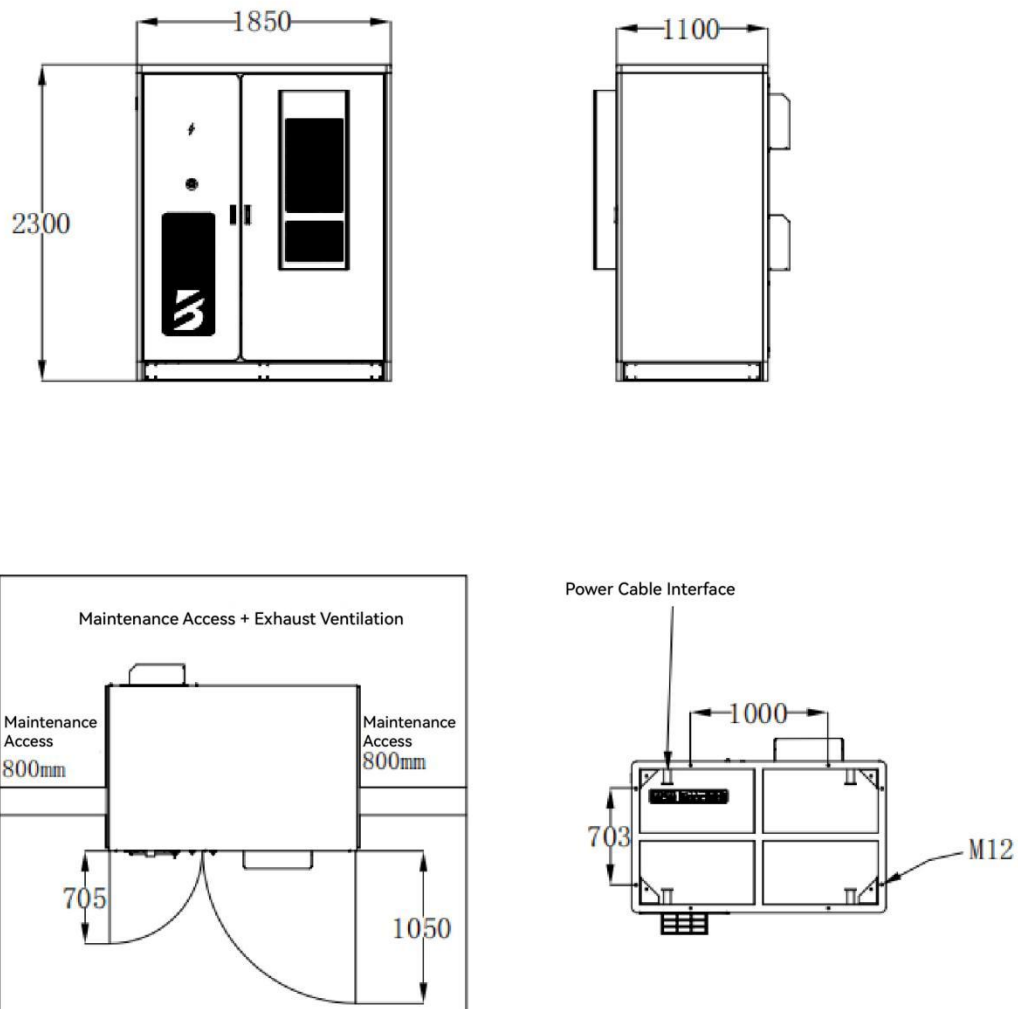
Basic Reference Drawing (actual dimension of equipment subject to shipment)
